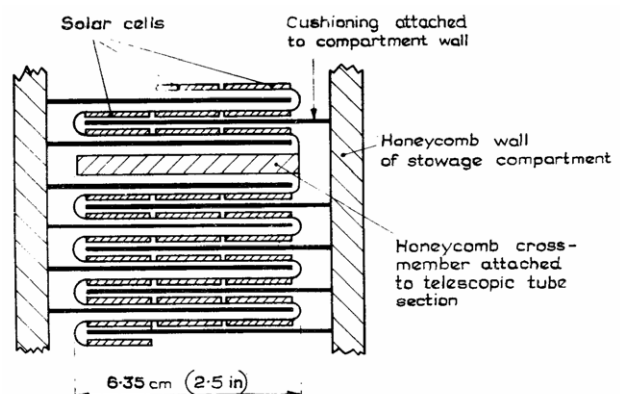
Illustration showing solar array stowage technique (RAE diagram).
